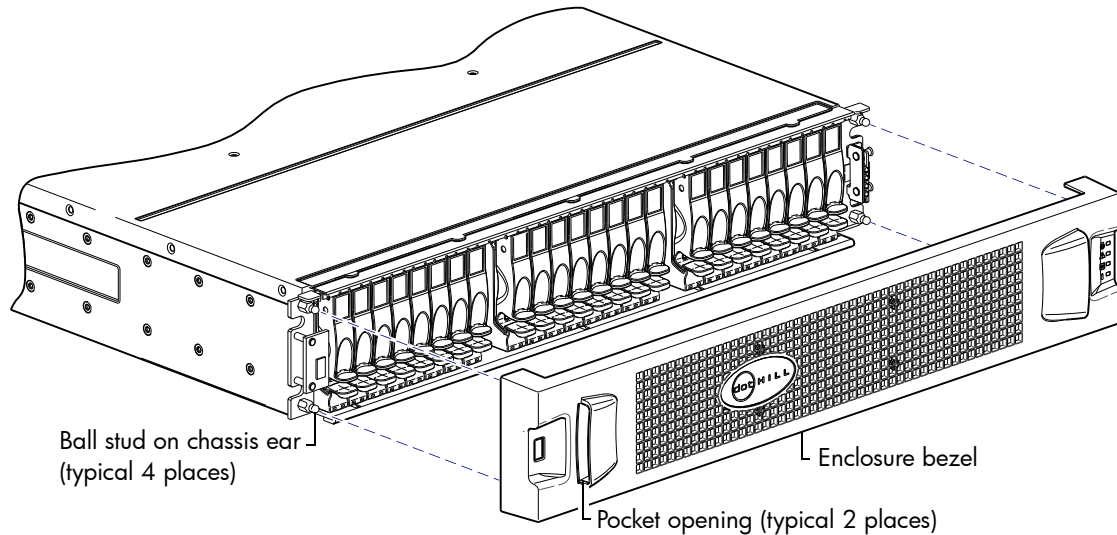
Partial assembly showing bezel alignment with 2U24 chassis
